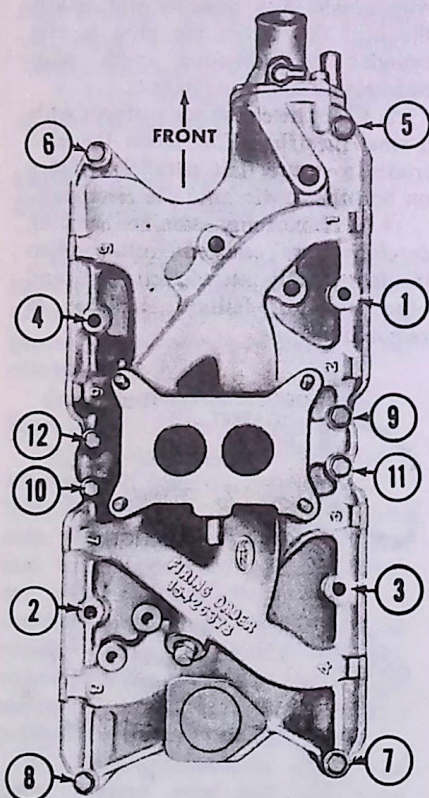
Intake Manifold Torque Sequence—302 Engine
